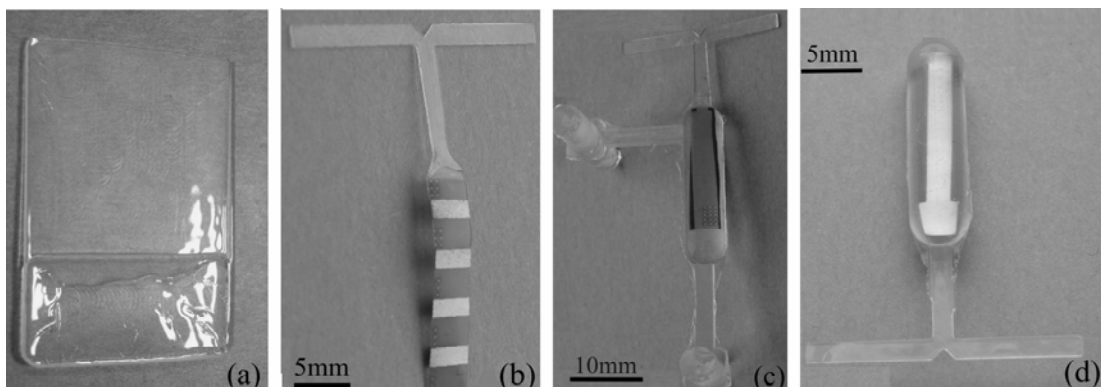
Pictures from the sensor manufacturing process: (a) PU film, (b) ensemble, (c) the pill after encapsulation by injection molding and (d) the simulated sensor.
